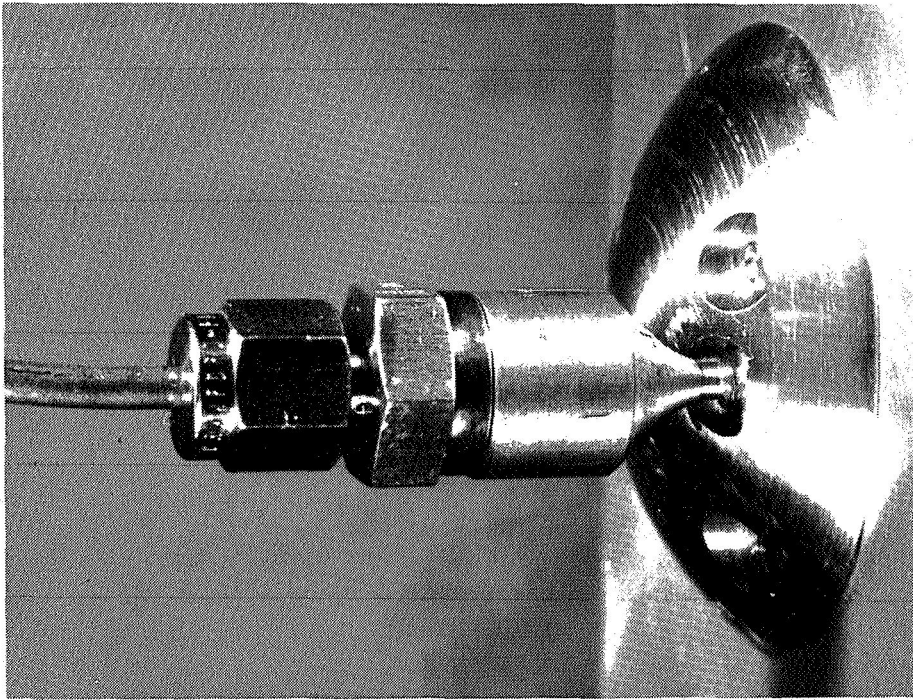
FIGURE III-II MODIFIED 1-INCH BUTTON-HEAD BOLT WITH IMPROVED PRESSURE FITTING
